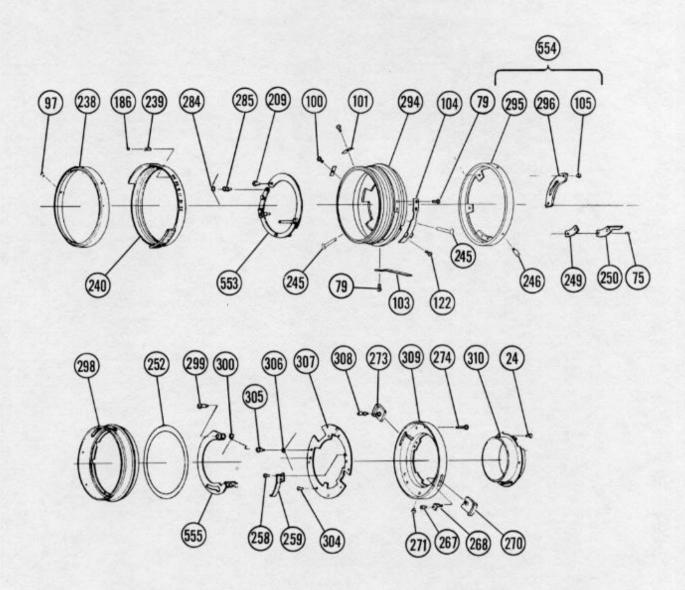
Mount Assembly, Olympus (Ref. 557, Pg 58)
